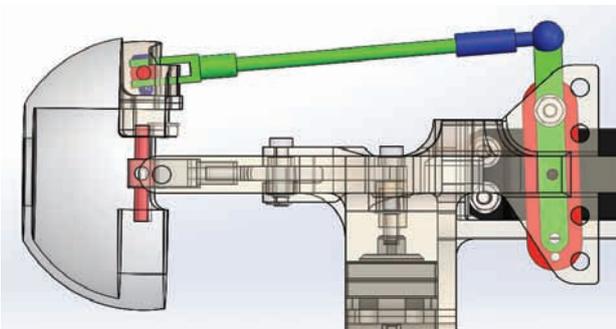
3D CAD model of the mechanism for the eye rotation about a horizontal axis
